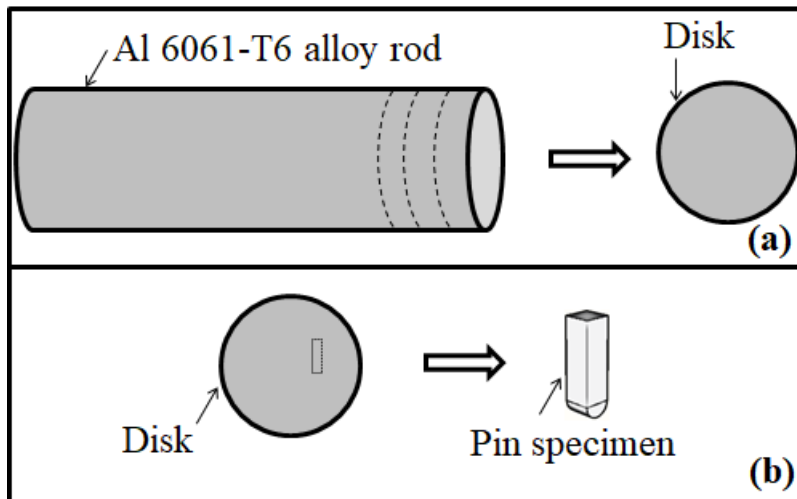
Fabrication of disk and pin specimen from the Al 6061-T6 metal rod.
